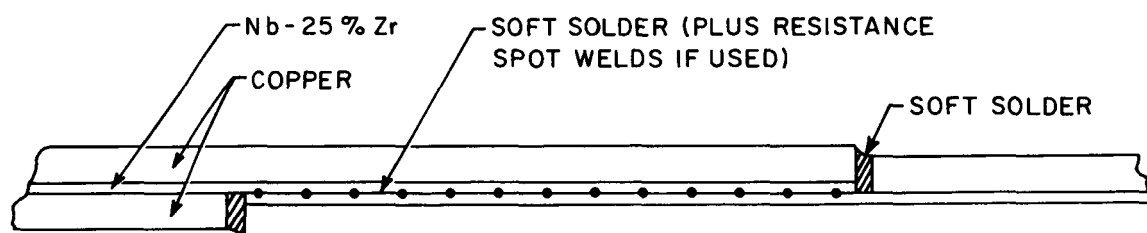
Typical lap joint between two sections of stabilized superconductor.
